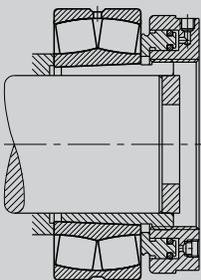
Dismounting of Withdrawal Sleeve by using Hydraulic Nuts
